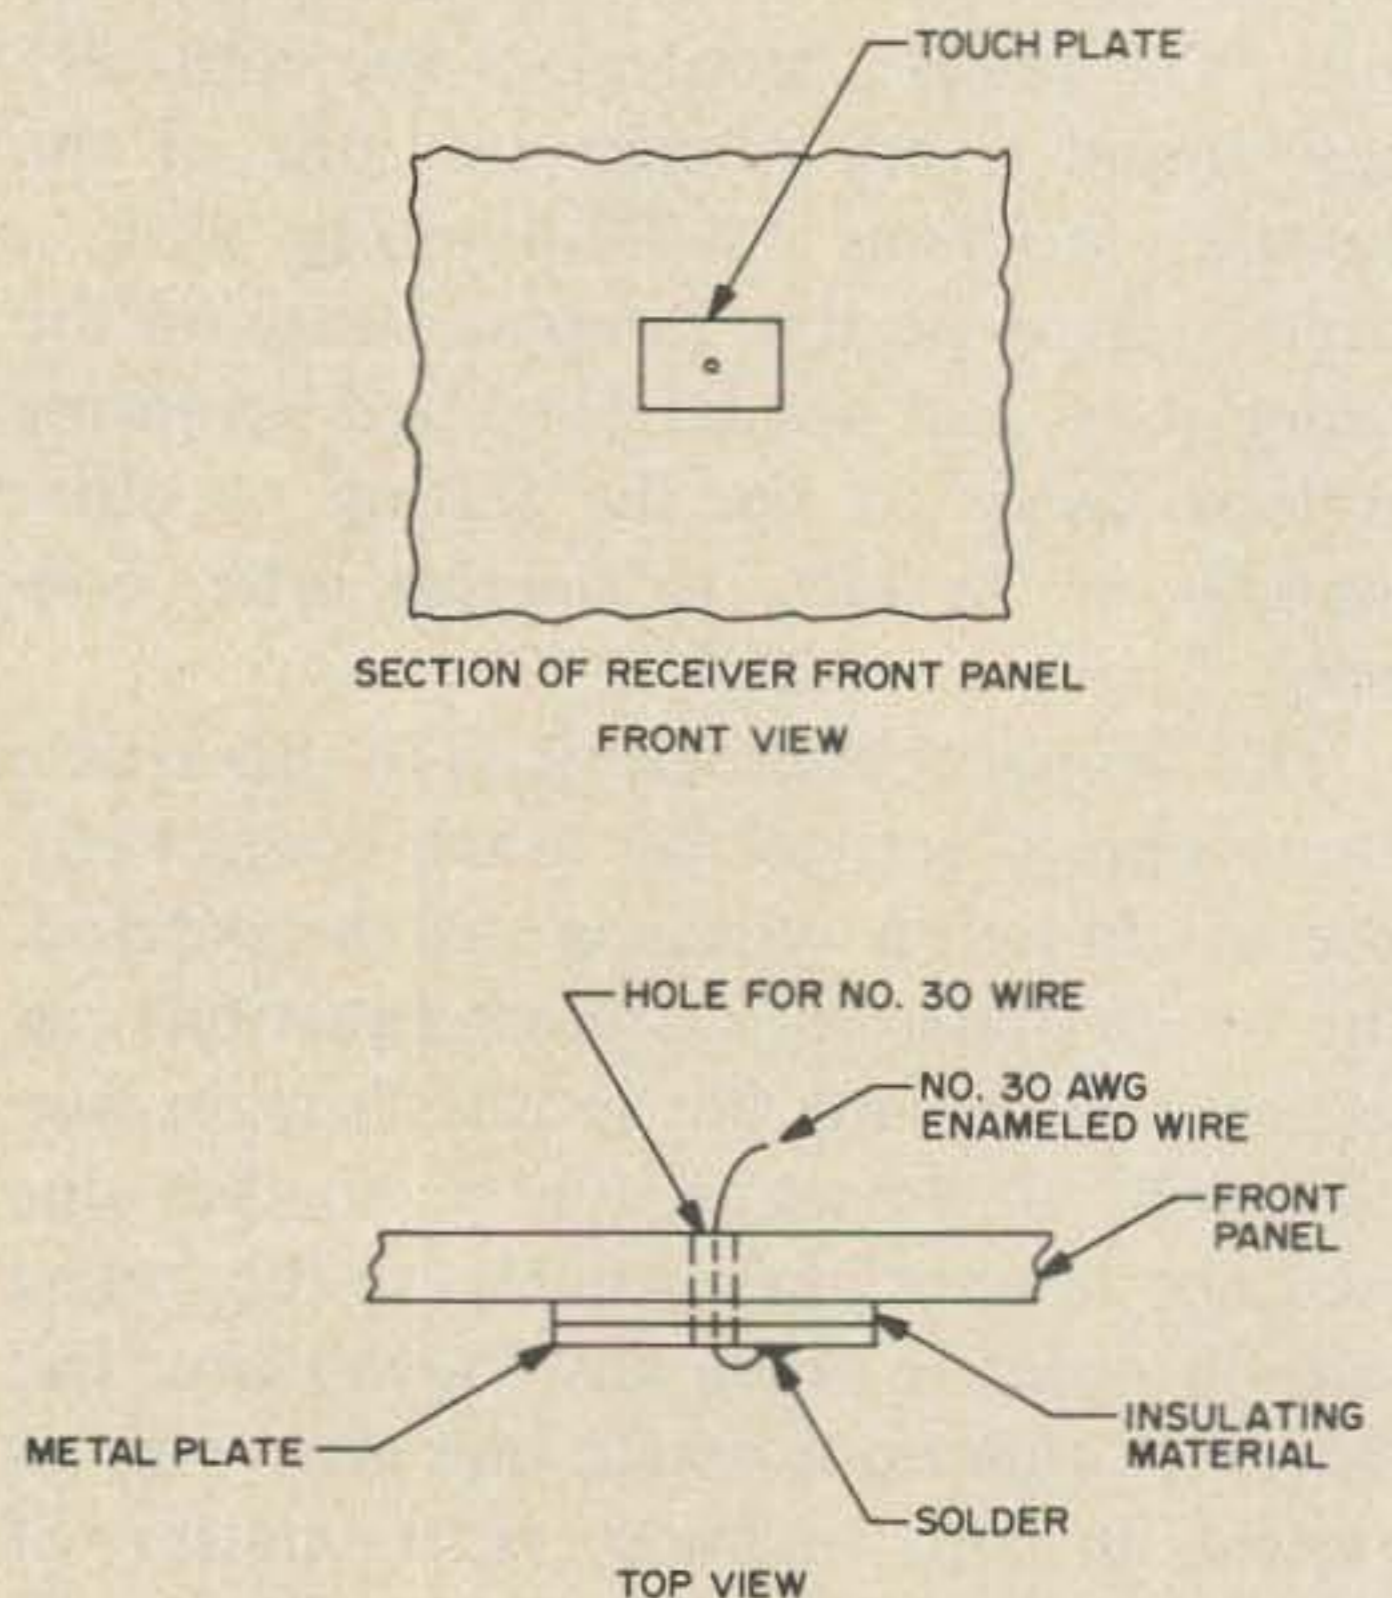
Details of construction of a touch plate which can be mounted on a receiver front panel.
